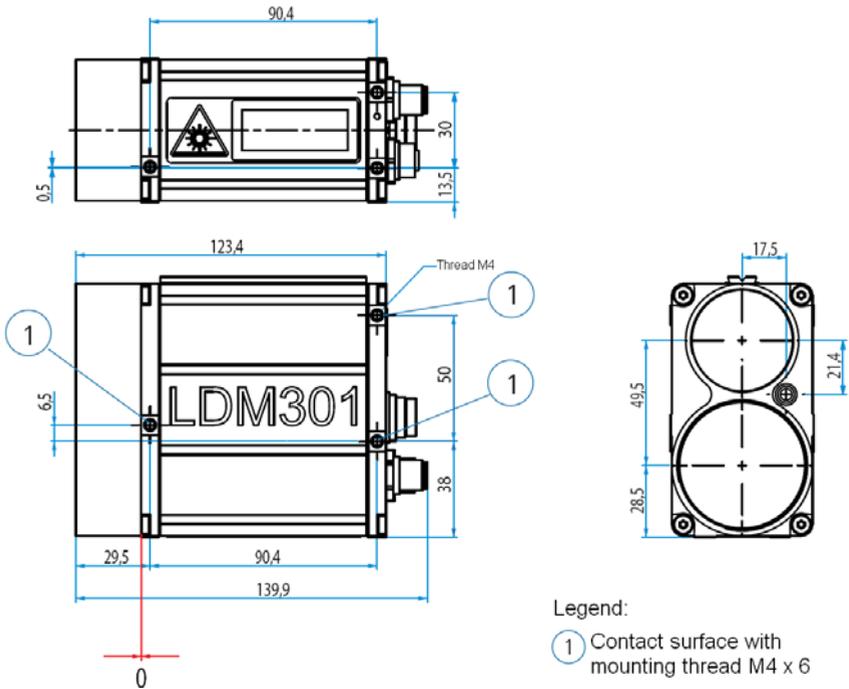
Fitting dimensions LDM 301, zero-point (dimensions in mm)
